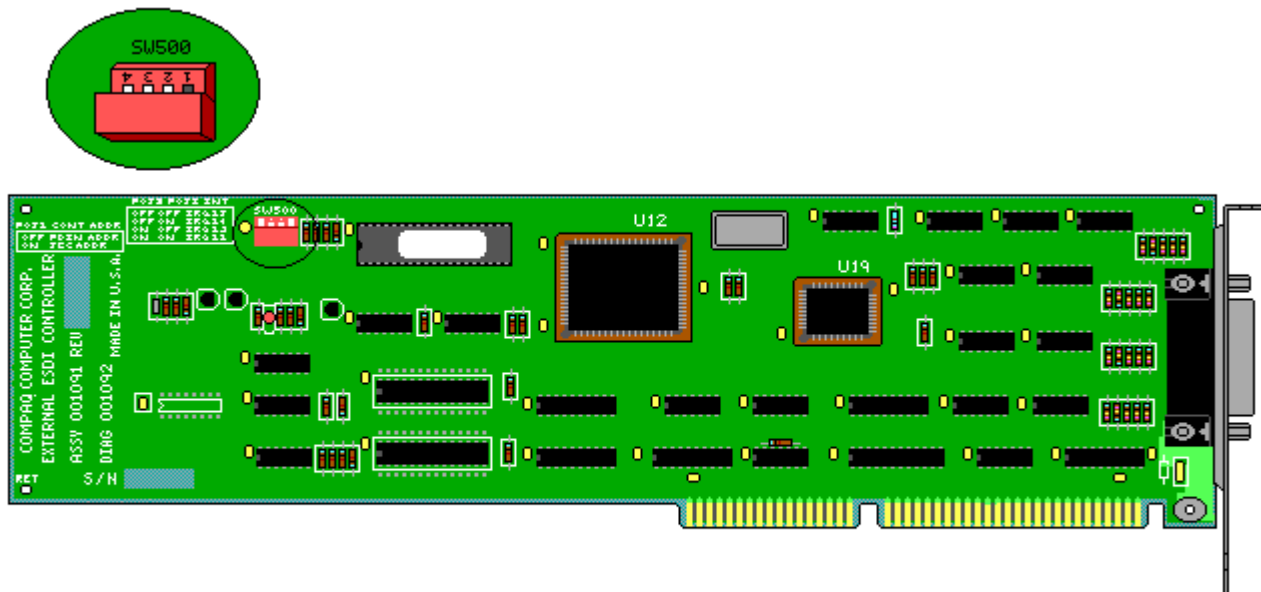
ESDI External Fixed Disk Drive Controller Board (Assy No. 001091)
